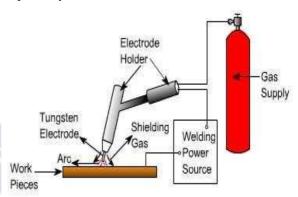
Schematic Diagram of TIG Welding System.
